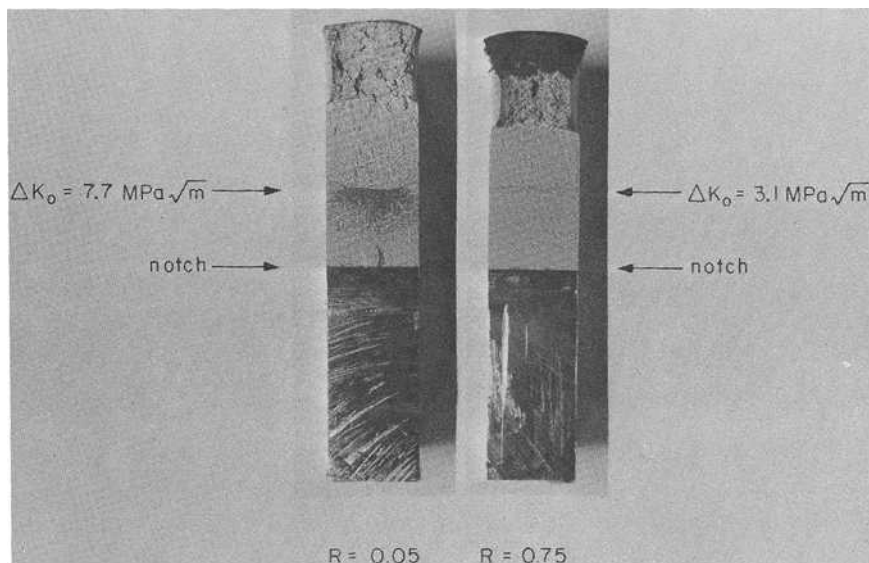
Zones of corrosion deposits formed on near-threshold fatigue fracture surfaces of SA542-3, tested in air at $R = 0.05$ and 0.75 .
